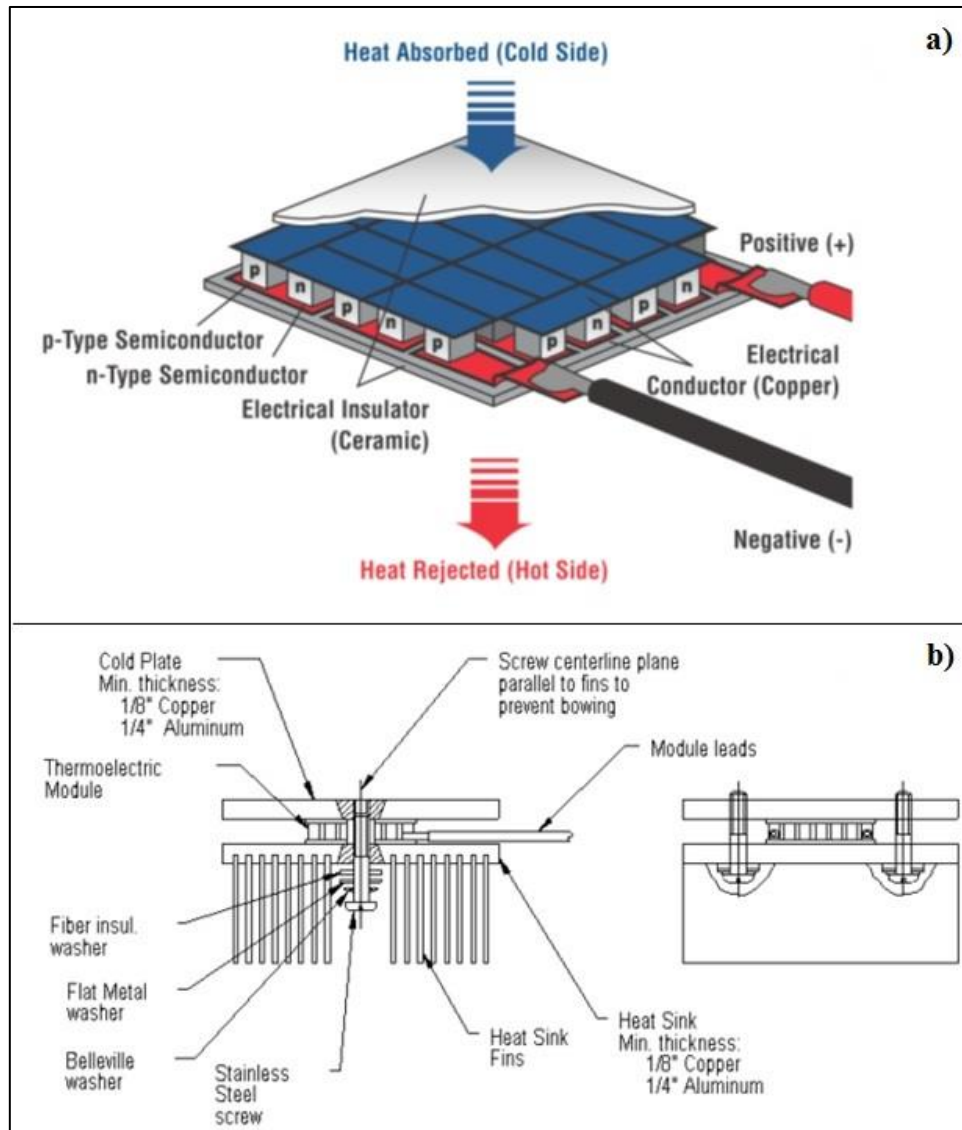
a) TEC 3D CAD and b) assembled TEC to heat sink fan for effective heat transfer [41].
